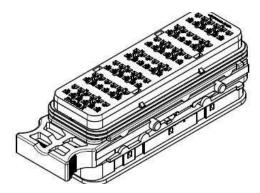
SRC Female 84 Pin Receptacle Housing Assembly
